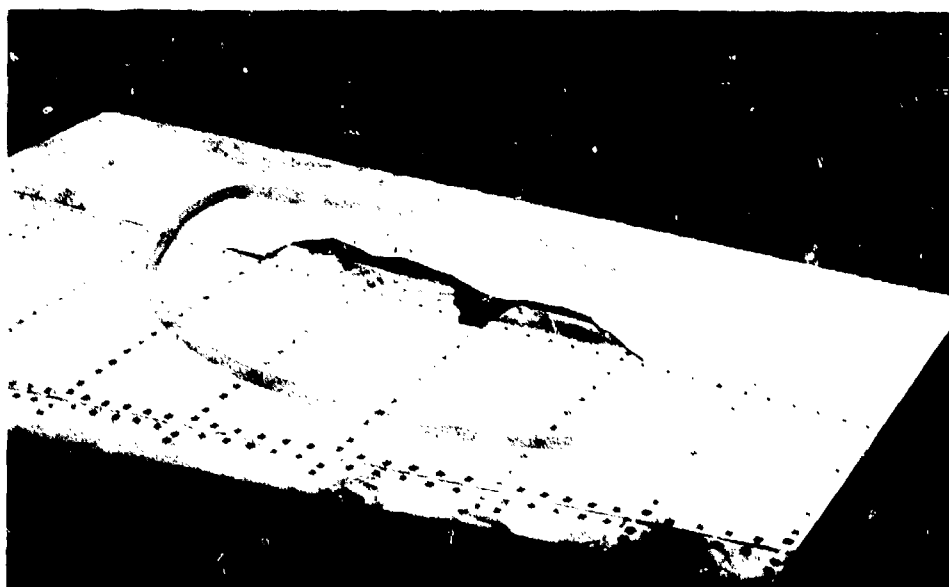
Tears in wings as a result of damage in the honeycomb assembly
